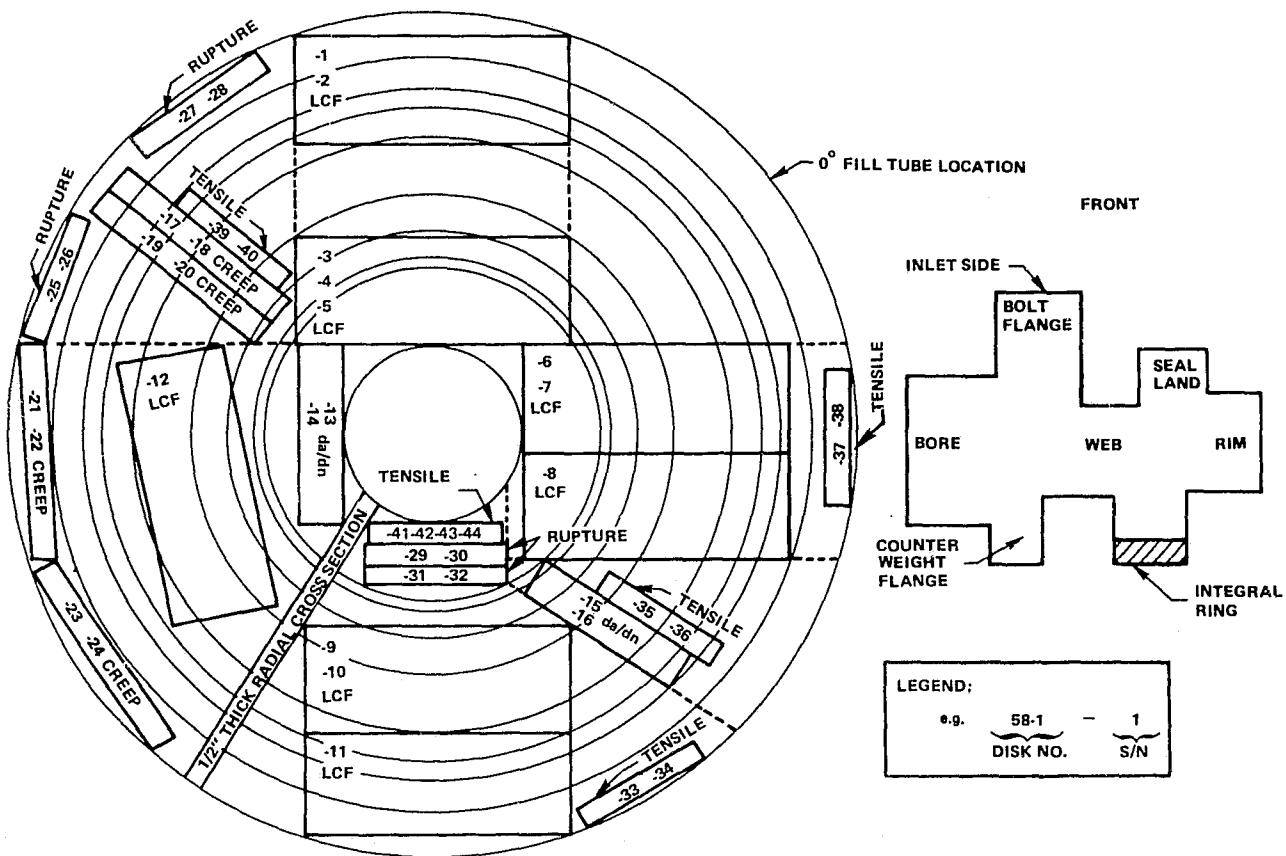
Identification and Location of Test Specimens Machined From Disks 58-1 and 80-1.
